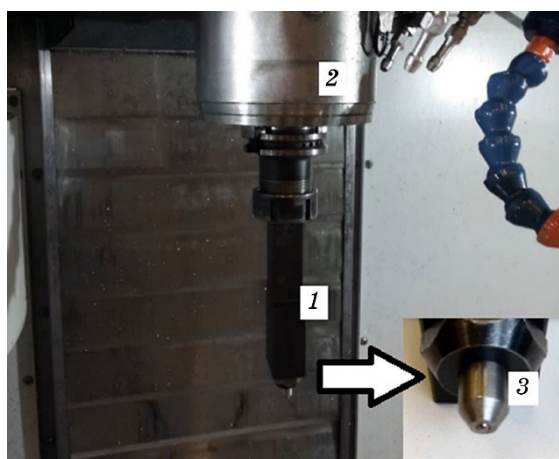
DB-3 burnishing tool adapted for structuring counter-samples: 1—DB-3 burnishing tool, 2—CNC milling spindle, 3—forming element.
